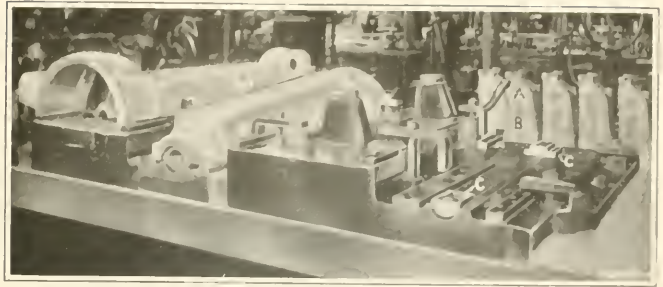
Milling Machine and Fixtures used for taking Finishing Cut over End of Gear-case and Top of Crank-case
